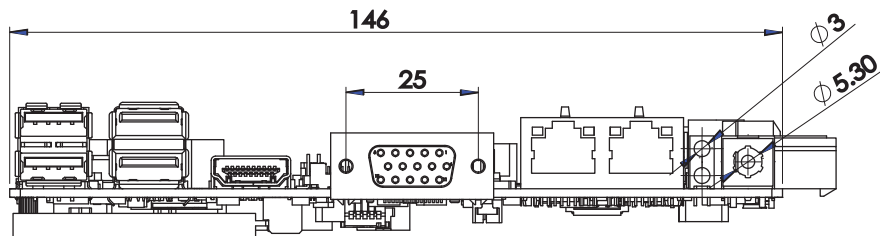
PCM-9310 Mechanical Drawing (Coastline)
